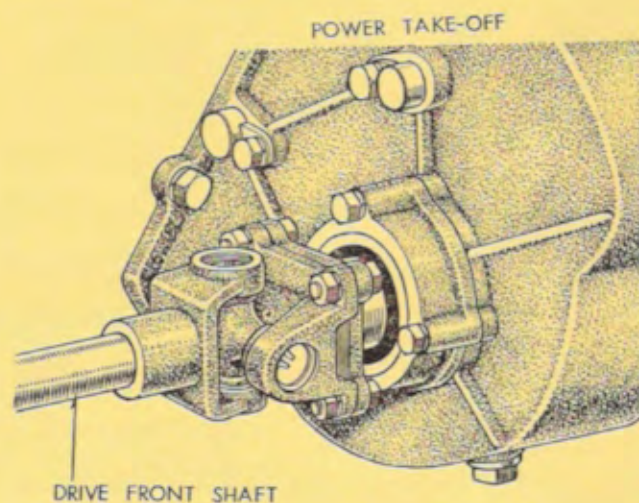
Assembling Joint Yoke Retainer to Joint Yoke
